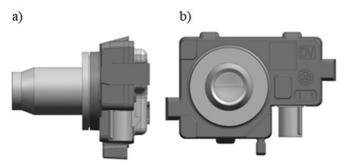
Tested active safety camera: side view (a) and front view (b)
